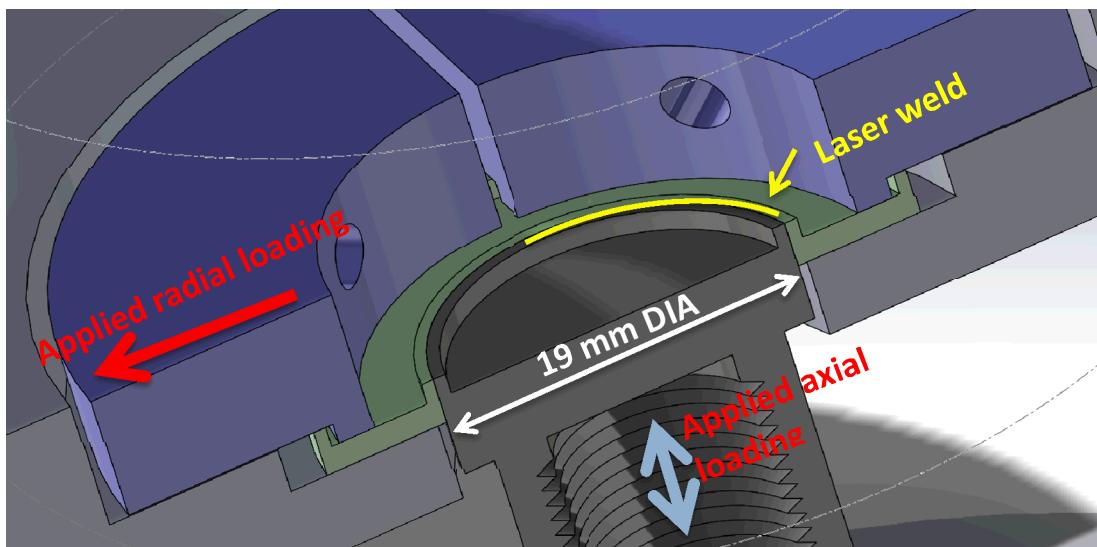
Schematic cross-section showing radial loading using outer lip of specimen and fixtures.
